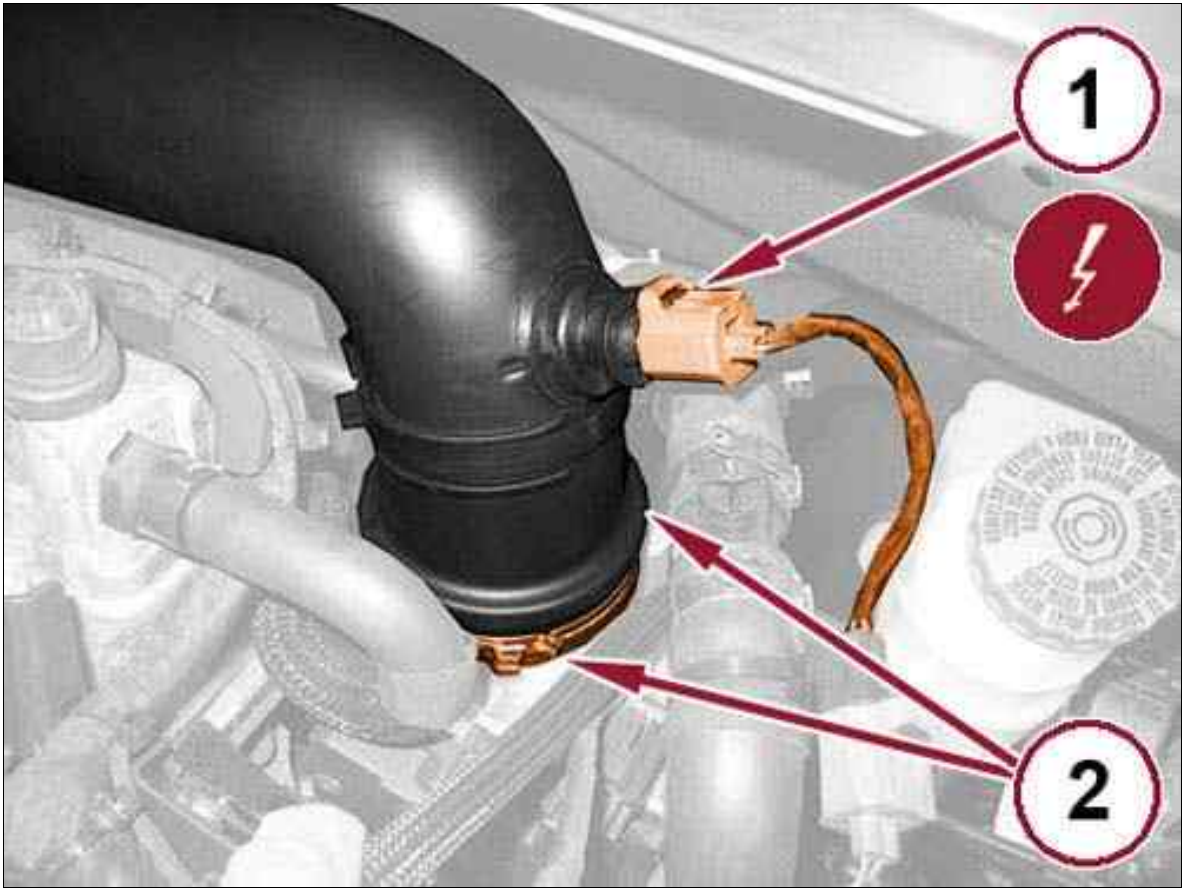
Engine Oil Vapor Hose Quick Coupling, Air Hose & Screw
